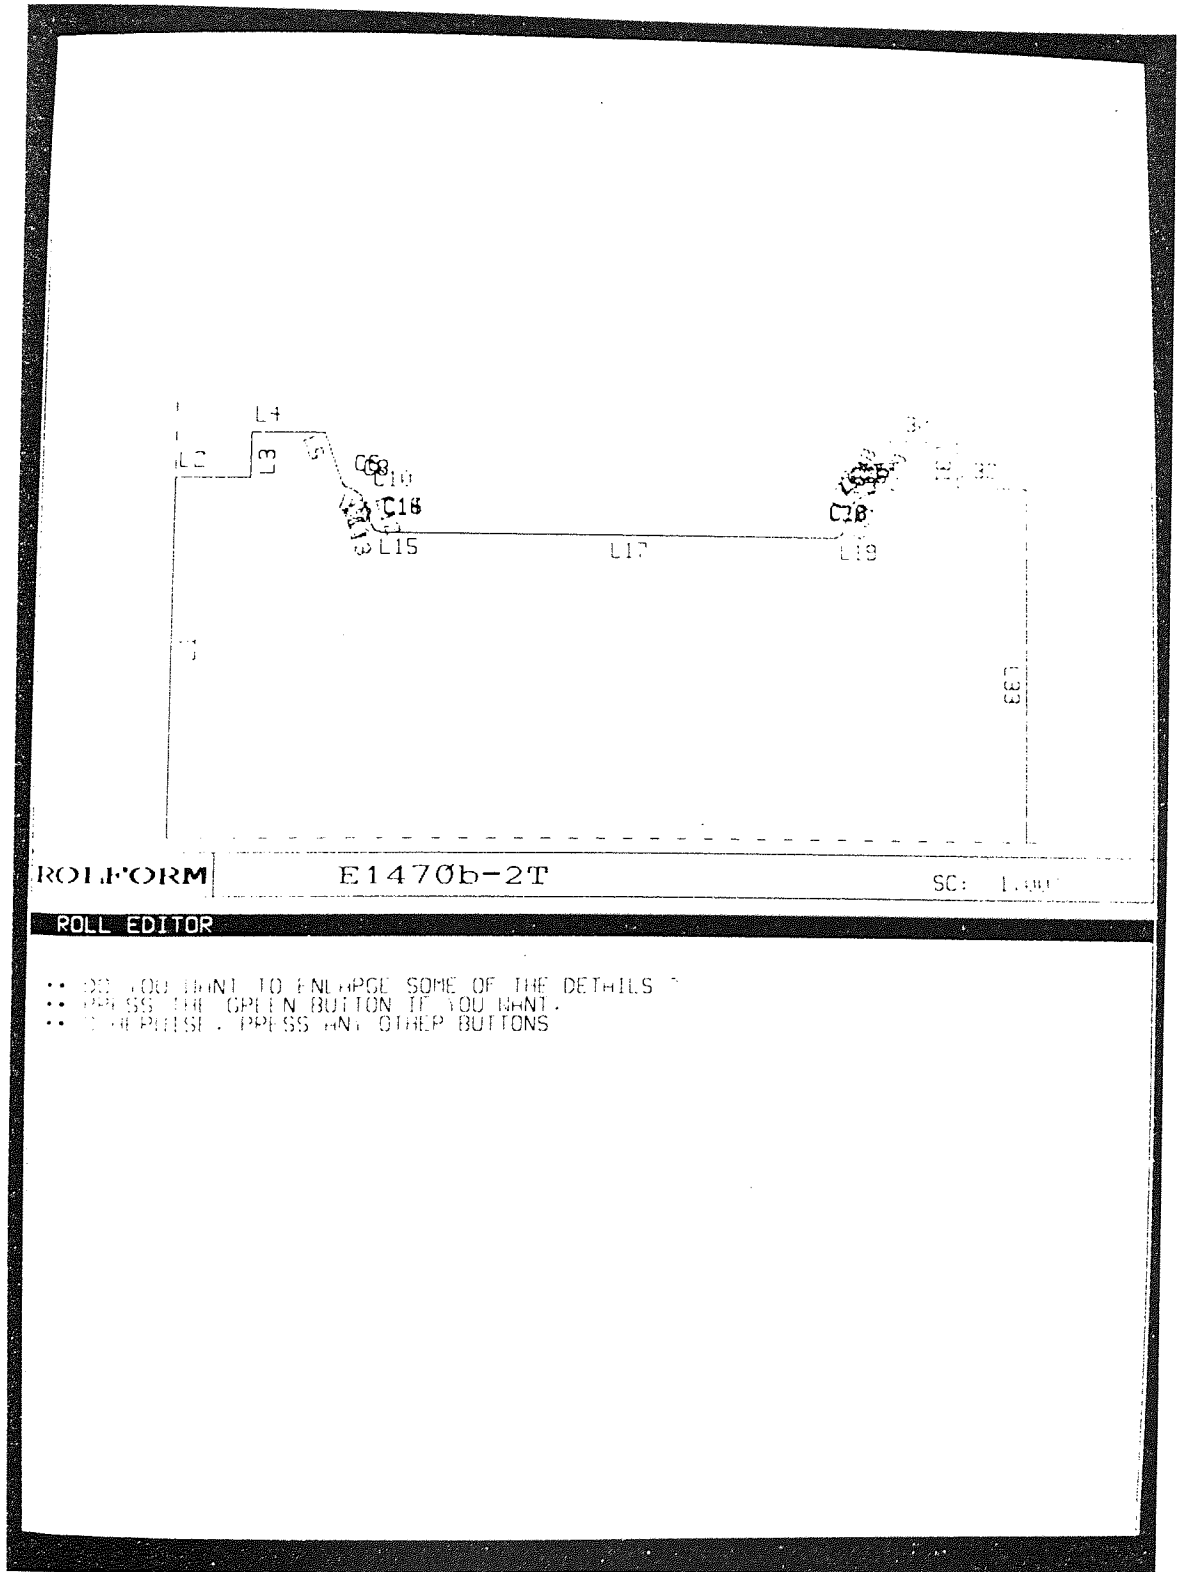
PERQ SCREEN DISPLAY OF A ROLL PROFILE DRAWING
